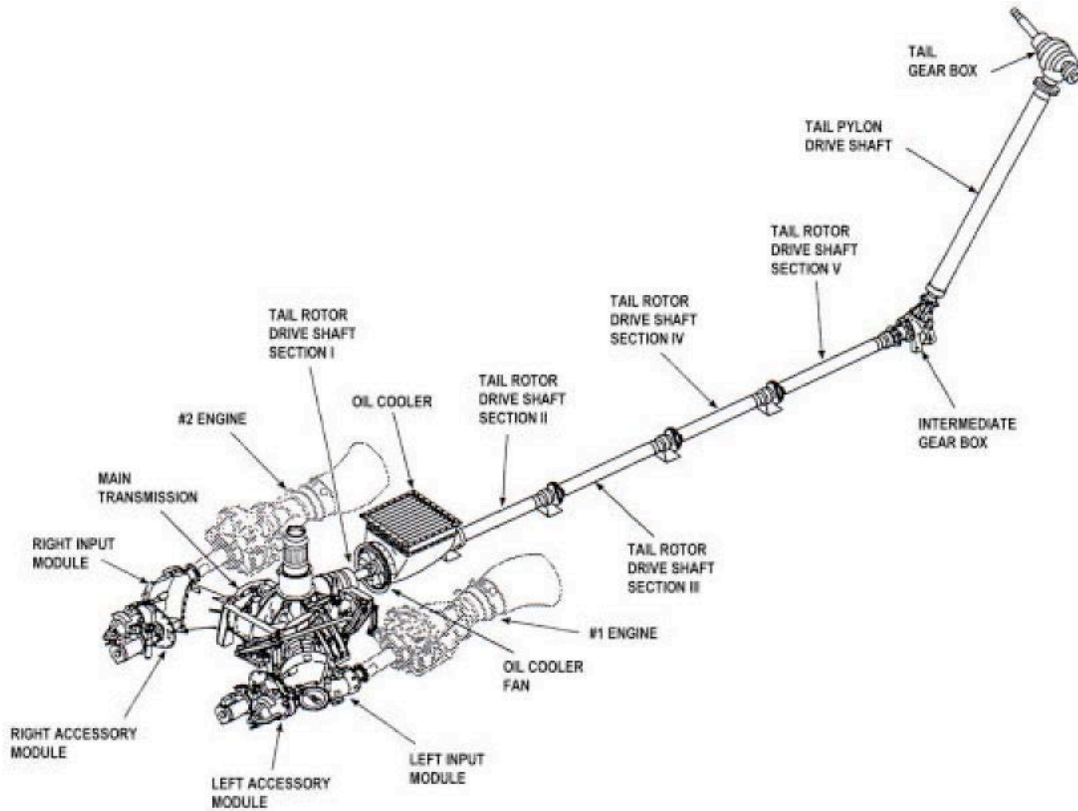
Drive system for the H-60 helicopter. Oil cooler bearings reside in the oil cooler fan, while hanger bearings provide support at the junctions of each section of the tail rotor drive shaft.
